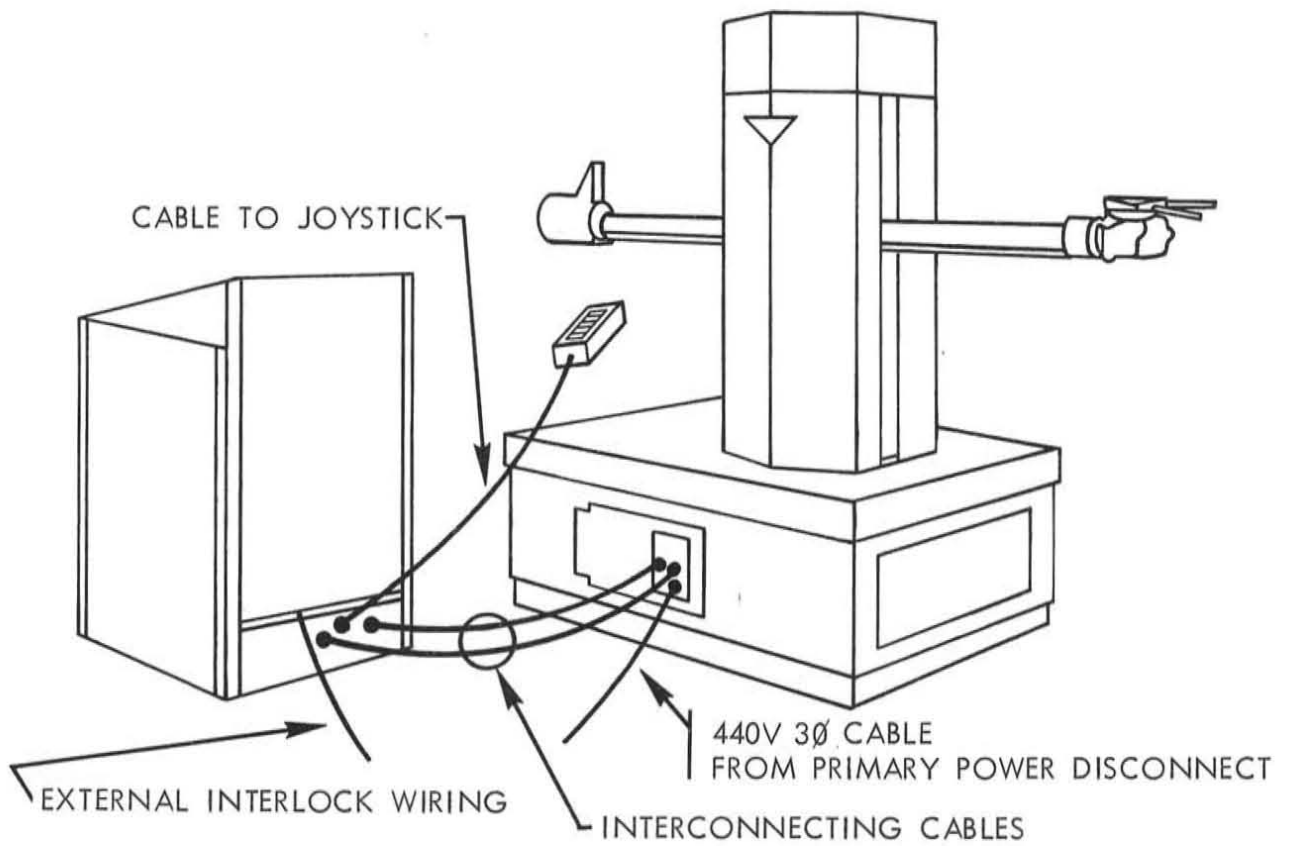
EXTERNAL WIRING AND CABLE CONNECTIONS
